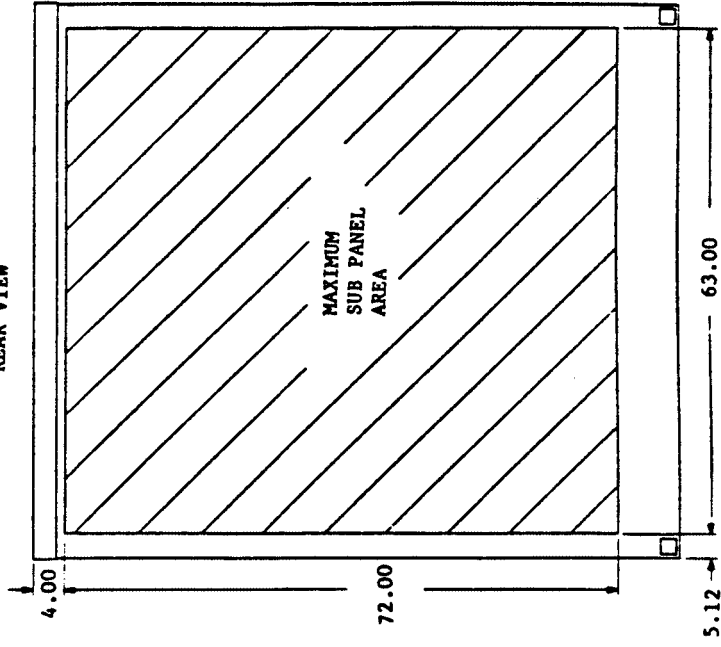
Installation Dimensions - 400 Thru 800HP
